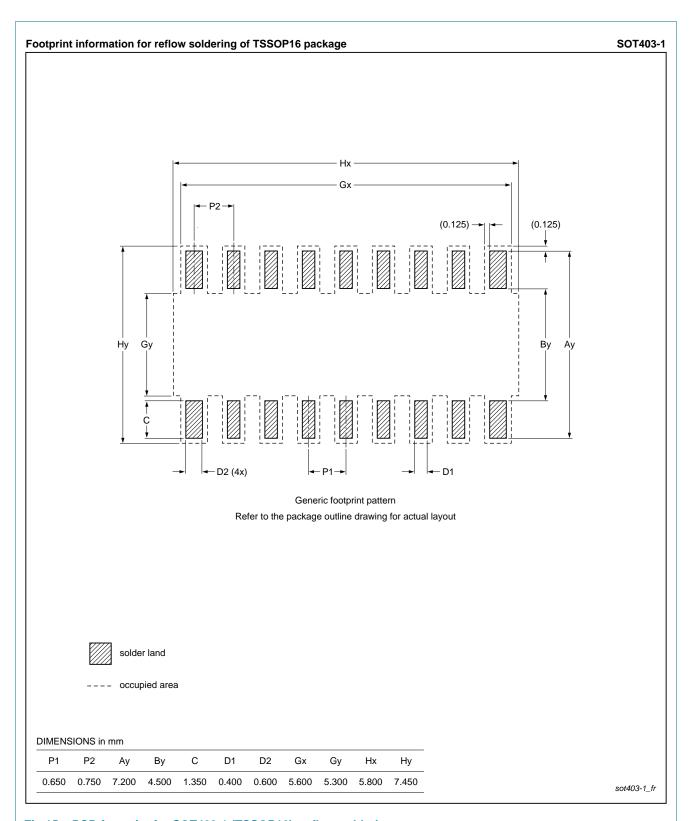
PCB footprint for SOT403-1 (TSSOP16); reflow soldering
